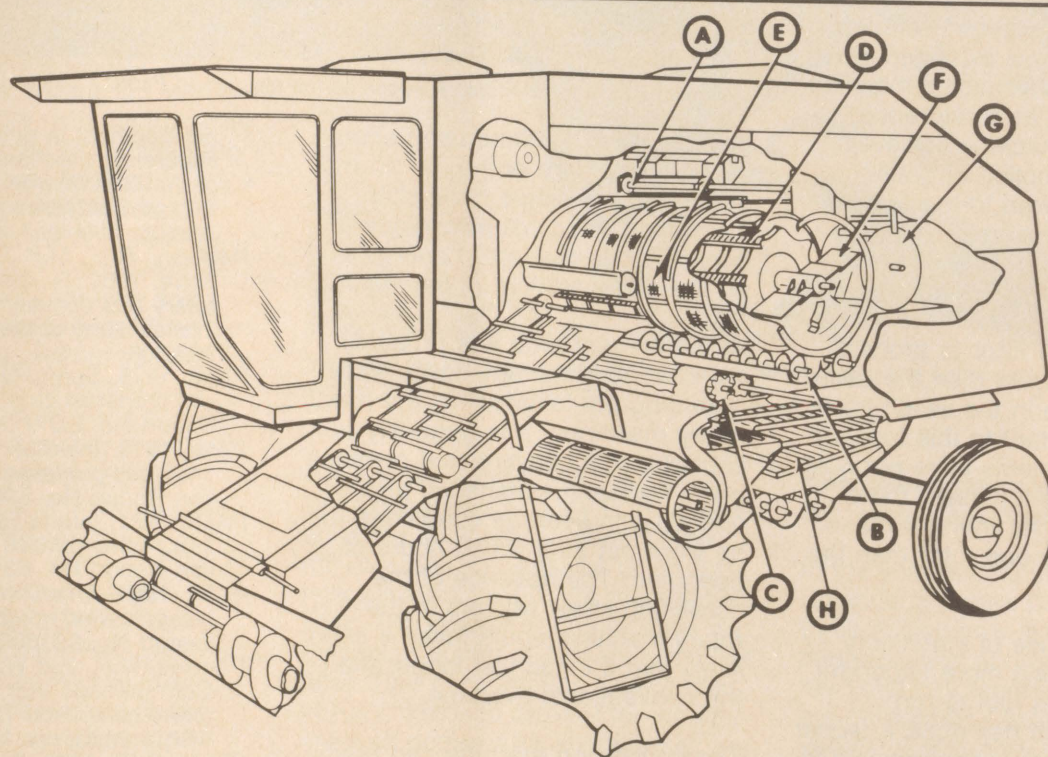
Single horizontal transverse rotor machine: (A) cage sweep, (B) distribution augers, (C) accelerator rolls, (D) rotor, (E) concave, (F) paddles, (G) impeller, (H) shoe.
